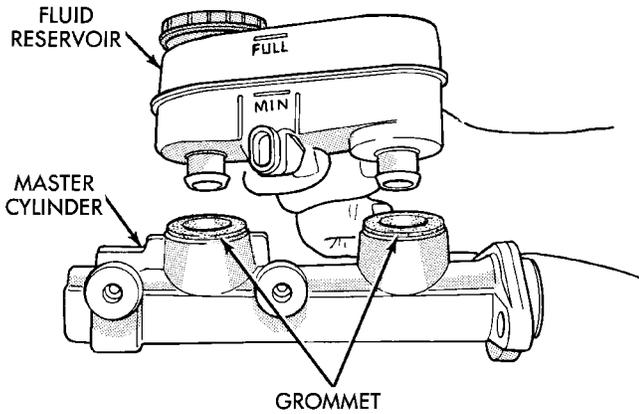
Removing Fluid Reservoir From Master Cylinder
